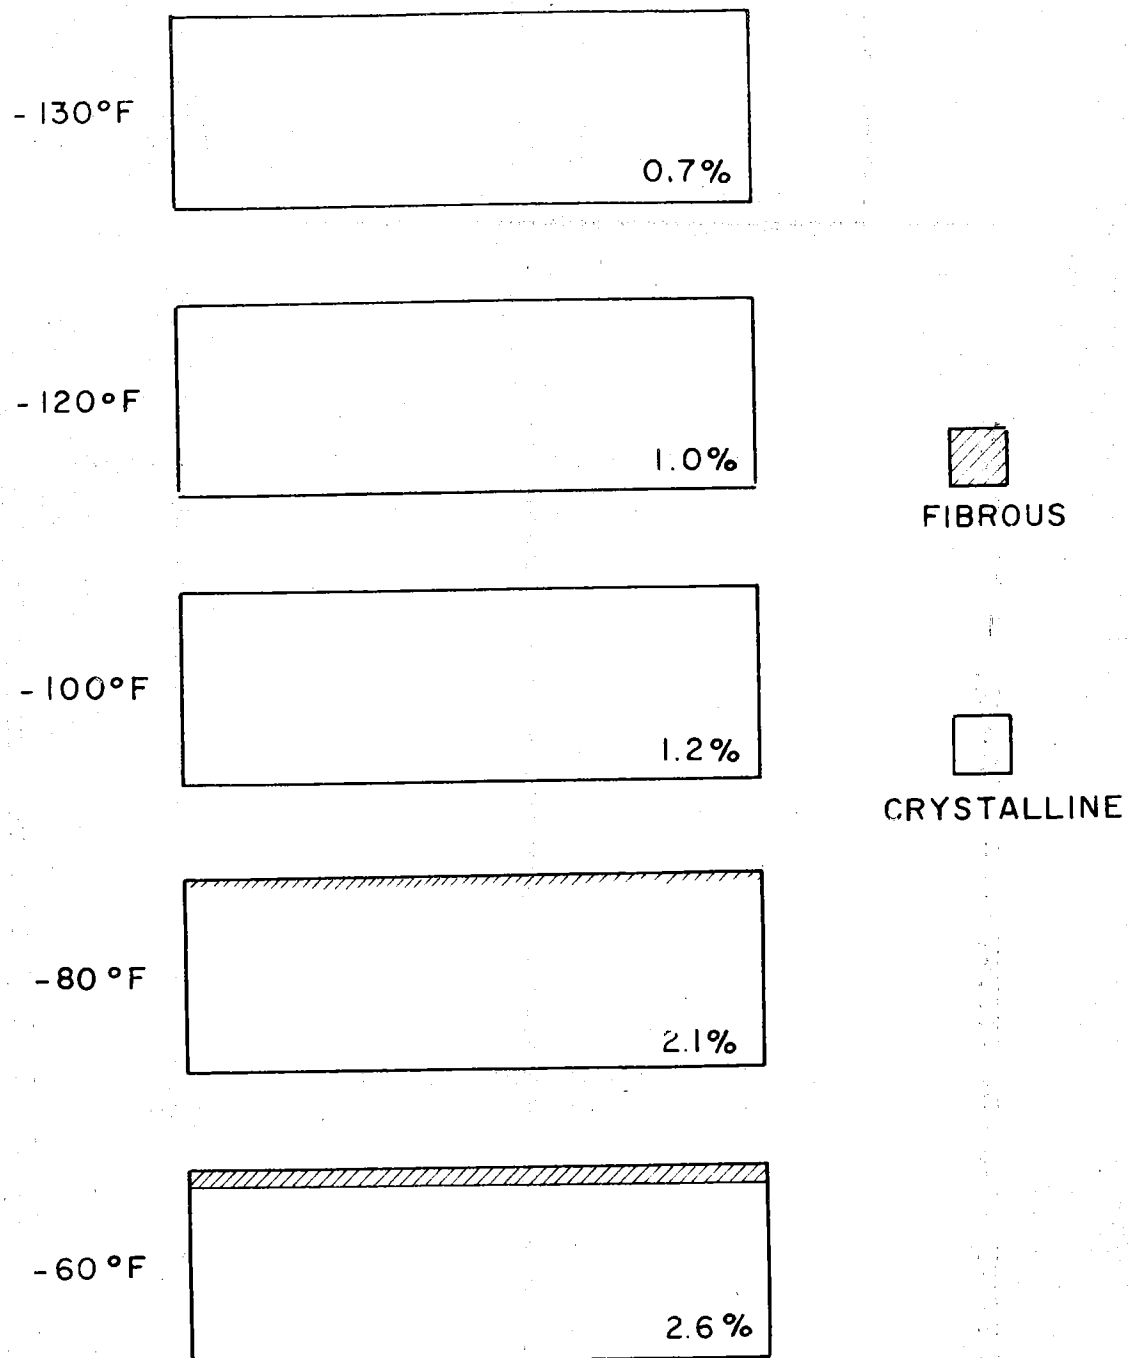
Fracture Behavior of Kinzel Specimens of 1" A-302 Steel, Unwelded.
